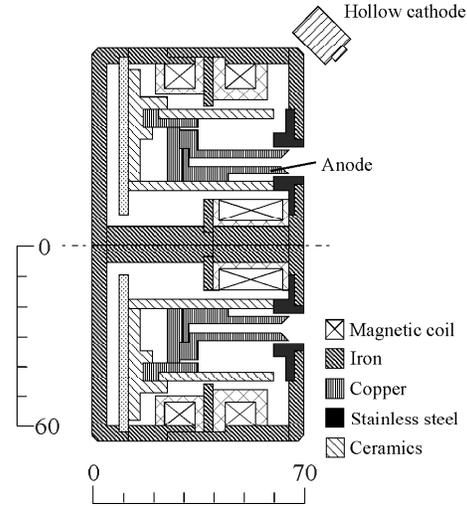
Cross-sectional view of TALT-2 Hall thruster without magnetic shields.
